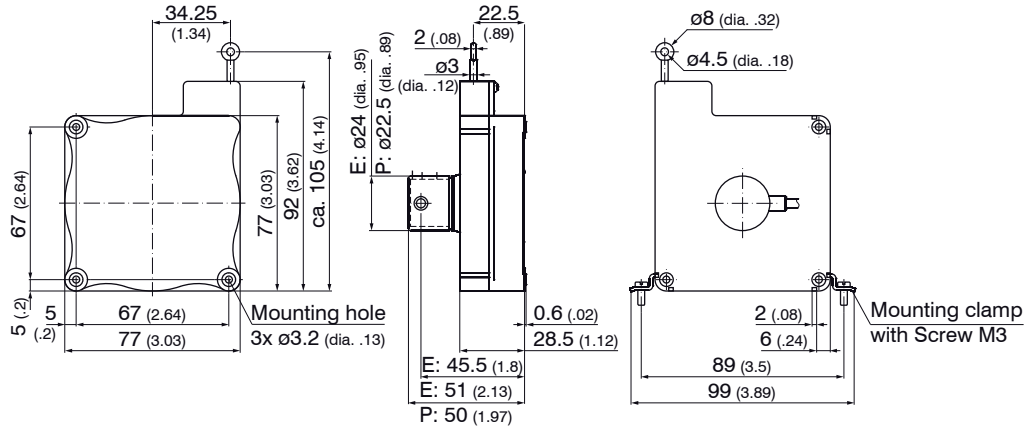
Dimensional drawing WPS-...-MK77, with potentiometer or encoder, dimensions in mm (inches), not to scale
